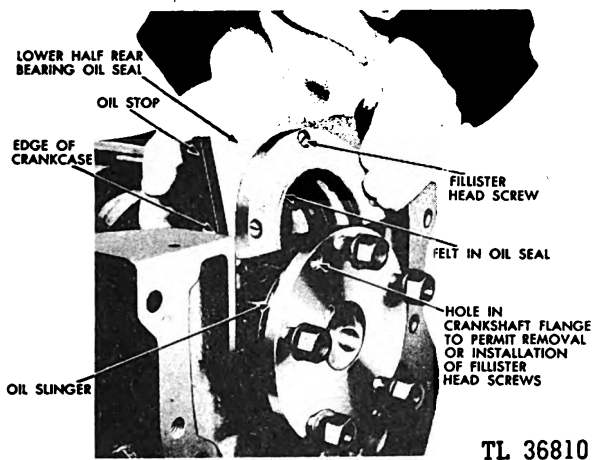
Installing Lower Half Rear Bearing Oil Seal
